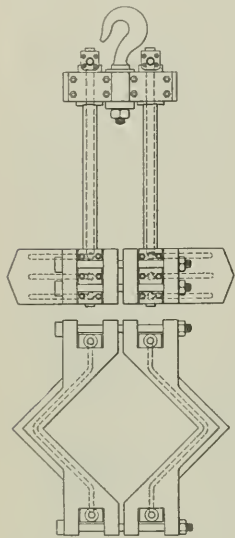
HOLDER WITH COOLING ARRANGEMENT
